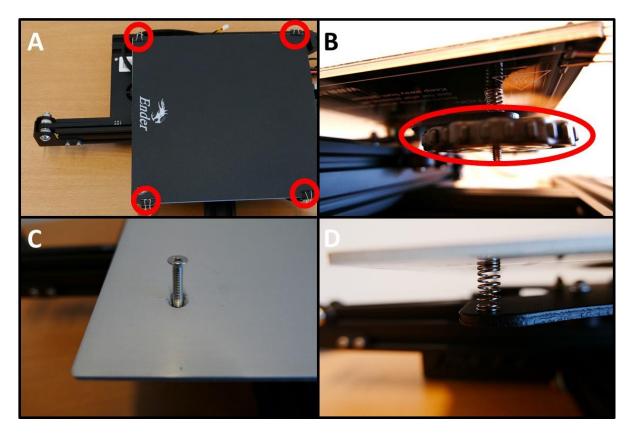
Obtaining the springs for the syringe clamp mechanism. A) Remove the spring clips holding the printbed cover. B) Remove the plastic handwheel. C) Remove the machine screw. D) The spring can now be removed and used in the pump.
